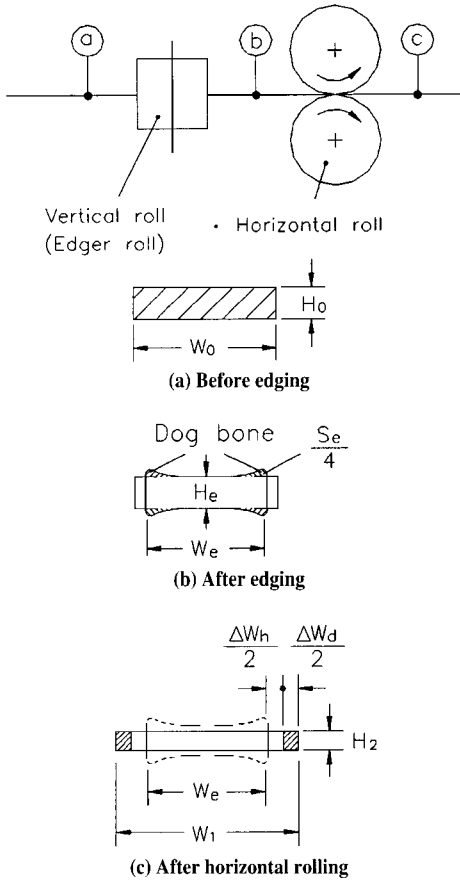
Cross-sectional deformation of slab after edging and horizontal rolling
